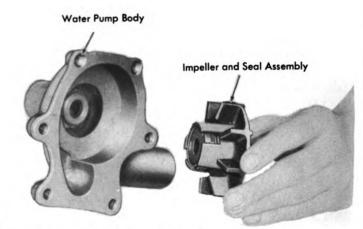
Removing Shaft, Impeller and Seal Assembly.
